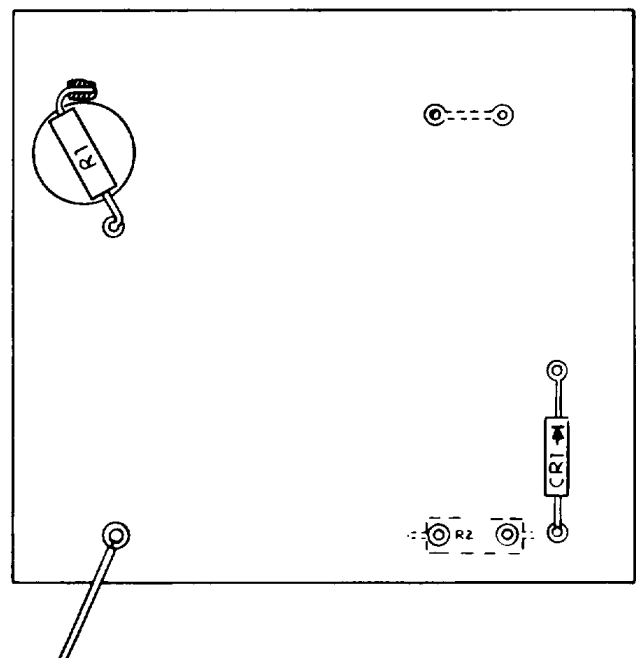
Frequency Coupler Assembly (A1A1A3), Component Locations
